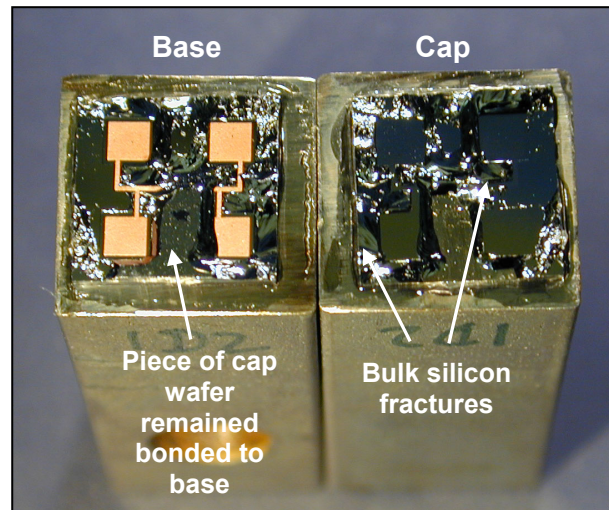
Photograph of base and cap samples on mounting blocks after tensile failure testing. General silicon fractures are evident and a piece of the cap is seen still bonded to the base, indicating a strong bond.
